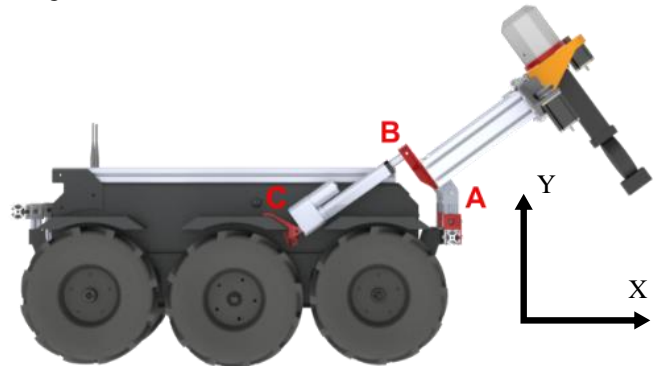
Side view of the robot with the locator tilted back for obstacles and joints
